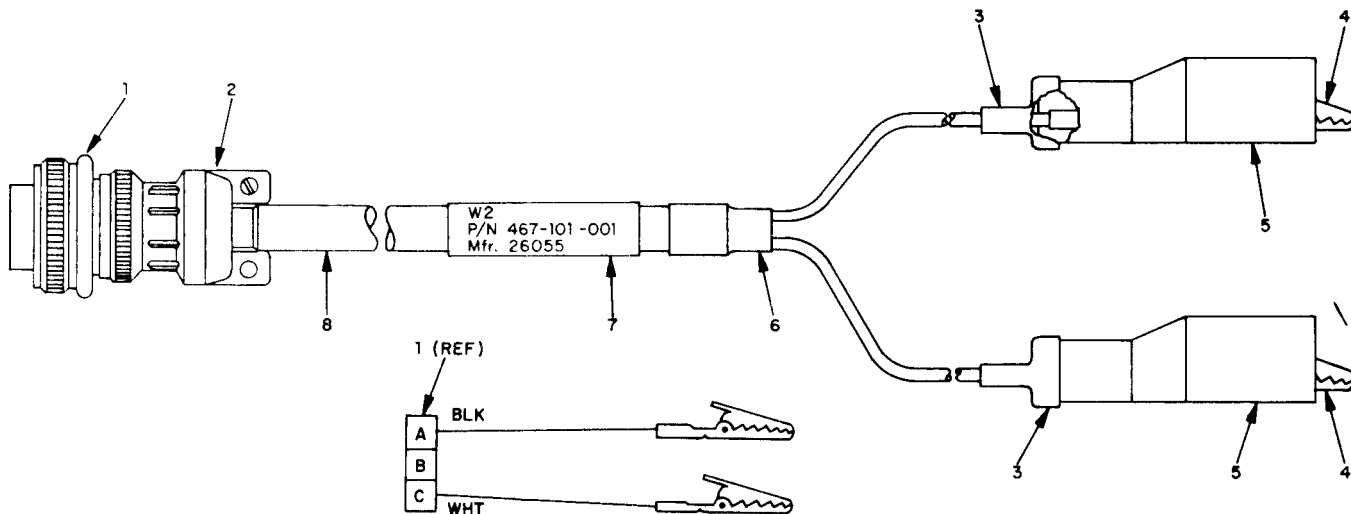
Input power cable assembly W2, part number 467-101-001
